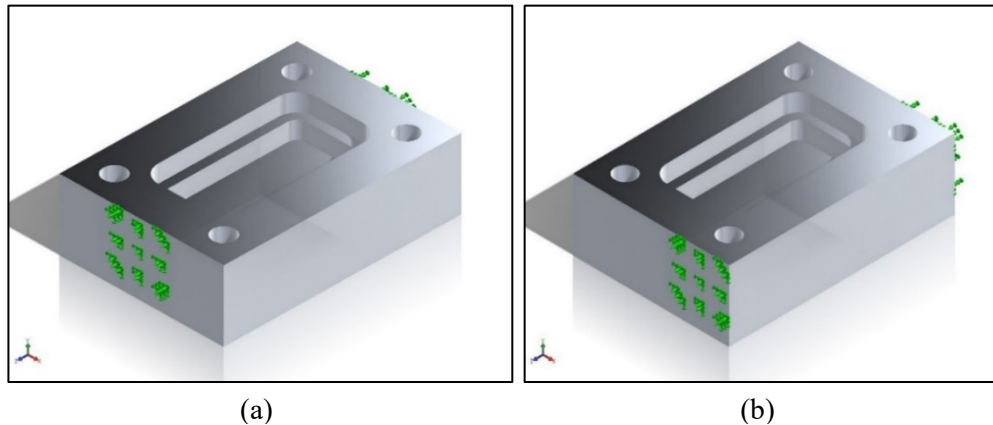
(a) Breadth-centre and (b) breadth-side fixturing for part 1
